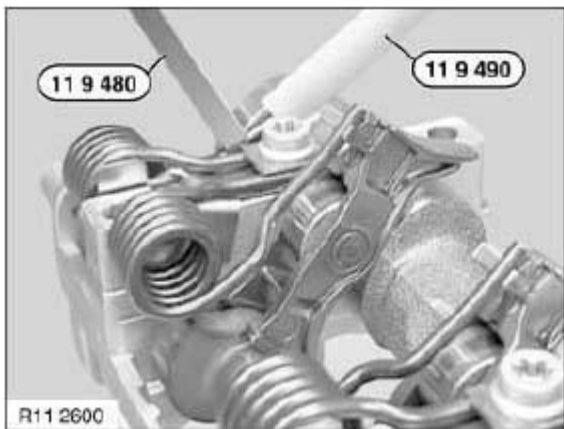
Identifying Special Tool (11 9 480) And (11 9 490)
